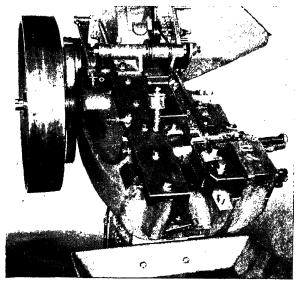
Top view of a thread-rolling machine. The die on the right is fixed to the frame of the machine while the die on the left moves with a machine crank. The screw blank is fed between dies. (Waterbury-Farrel.)
